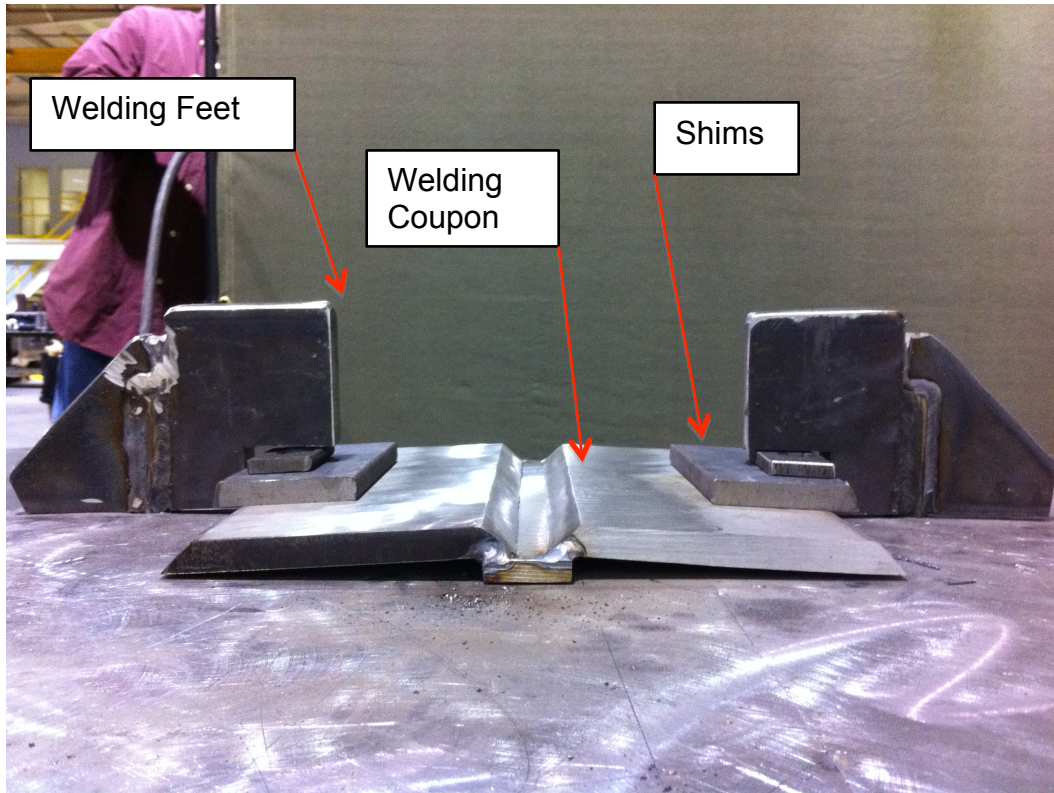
Image of Welded Coupon and Welding Feet
